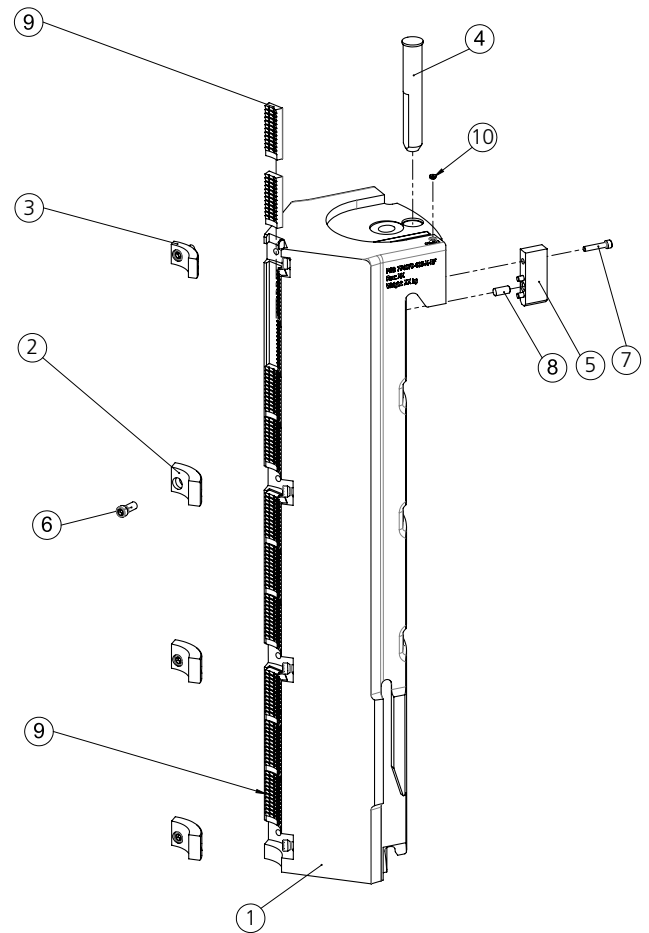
774070-BC* Carrier Assembly Drill Pipe and Casing
